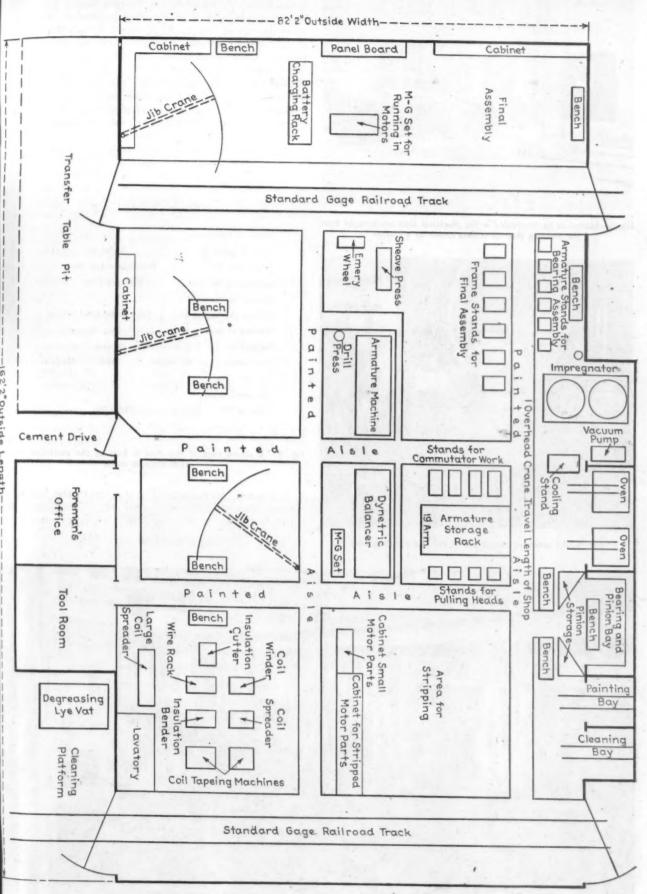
A plan view of the electrical shop showing layout of the equipment
